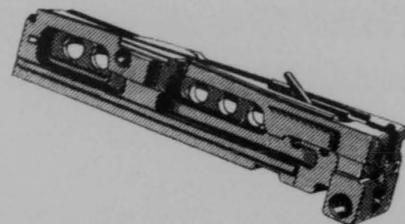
Bolt Group with Extractor Assembly Removed.
